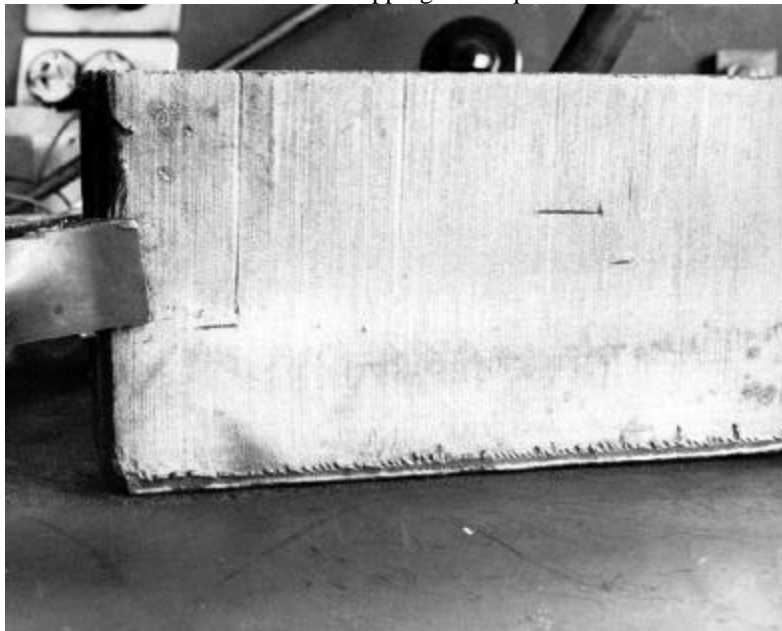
Magnetic Particle Indications of Laminations Shown on Flame-Cut Edge of Thick Steel Plate.
